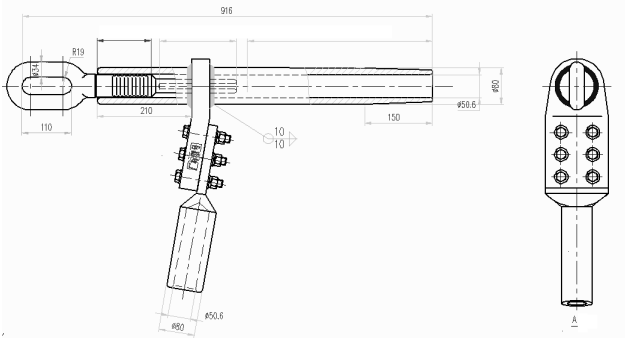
Design Drawing of Strain Clamp NYX-1520/125
